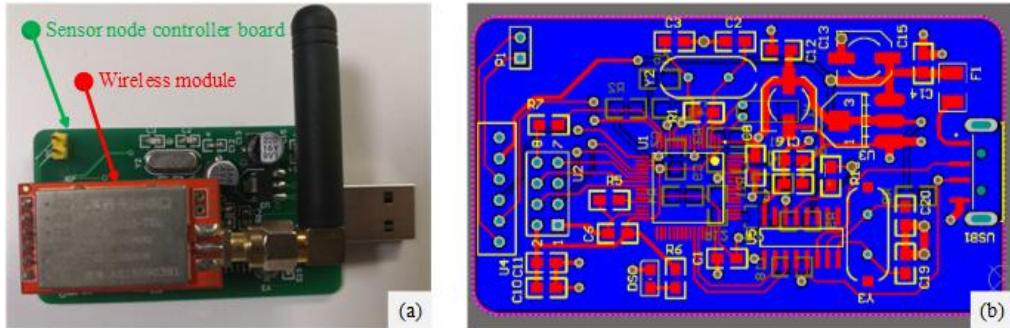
Photo of the integrated sensor node controller (a) and PCB layout of the developed sensor node controller board (b)
